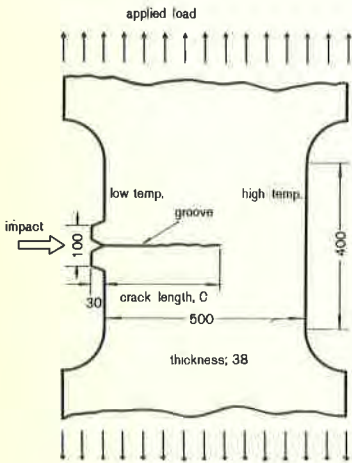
Modified ESSO test specimen for weld joint (unit; mm)
